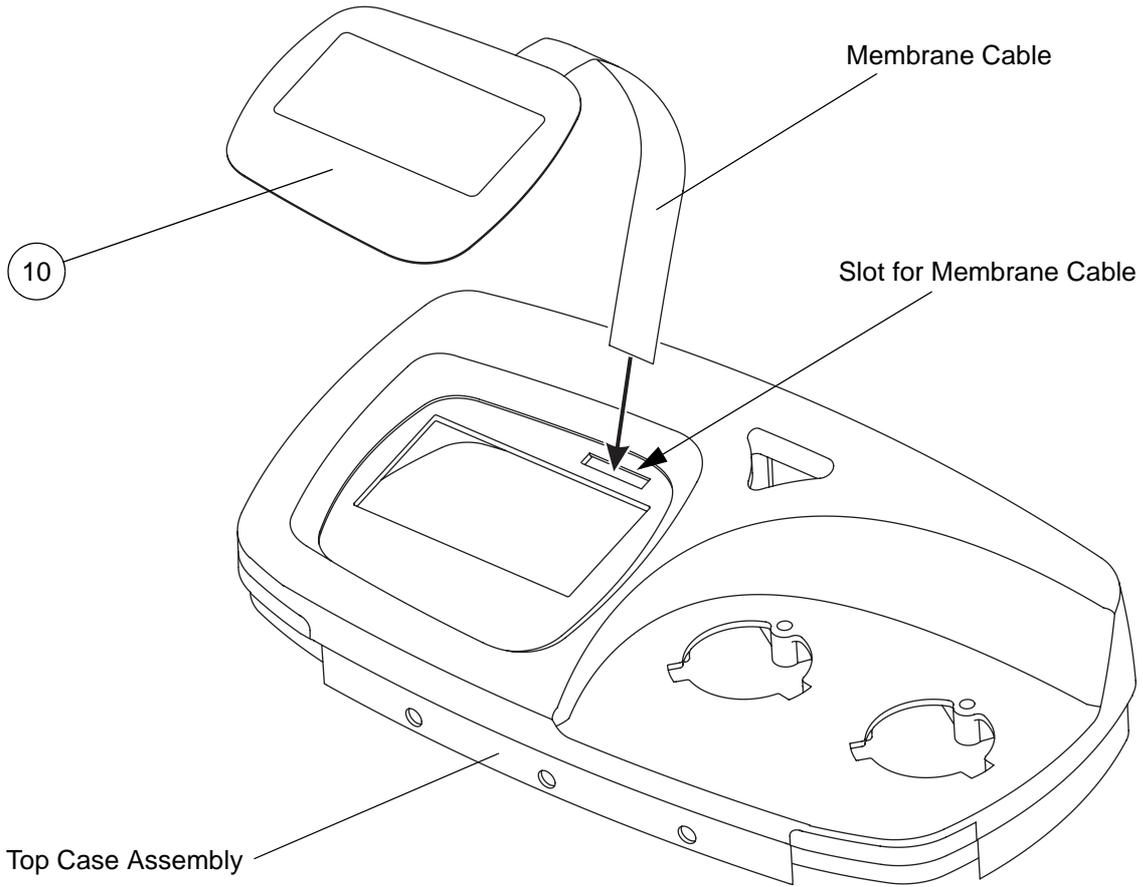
Replacing the Membrane Label when the Control PCB Assembly has been removed from the Top Case Assembly
